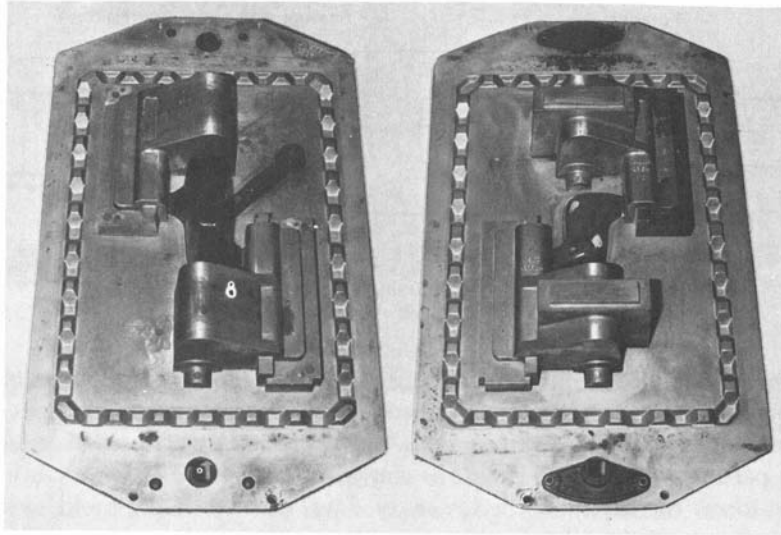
Match-plate pattern for molding two parts: (left) cope side; (right) drag side.
